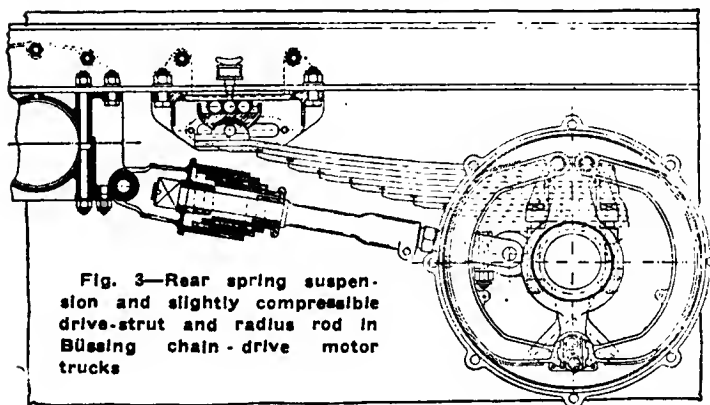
Rear spring suspension and slightly compressible drive-strut and radius rod in Büssing chain-drive motor trucks
